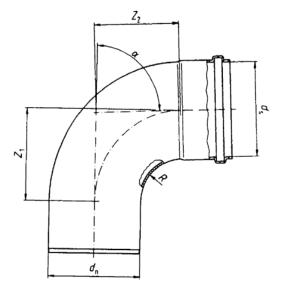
BEND WITH SINGLE SOCKET (SWEPT)
